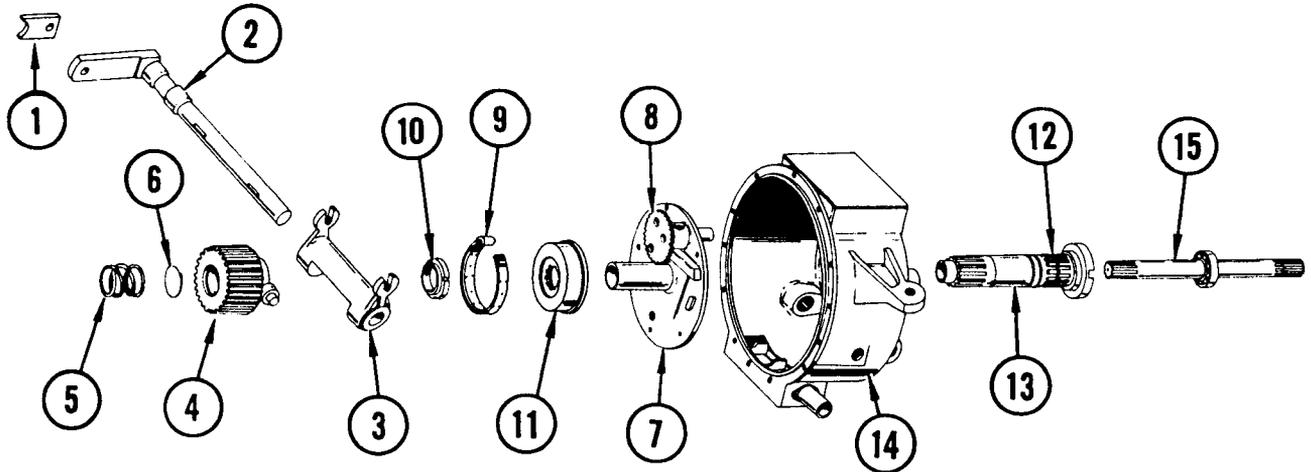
EXPLODED VIEW OF CLUTCH HOUSING ASSEMBLY
